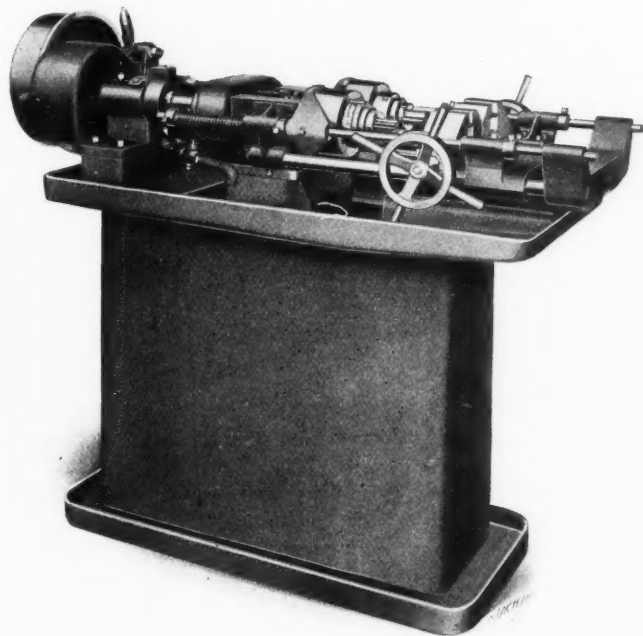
National-Acme No. 2 A Bolt Threader and Tapping Machine
